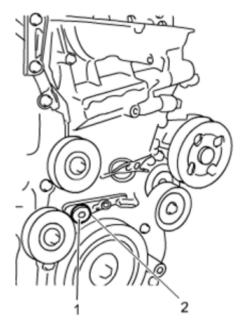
Identifying Timing Chain Cover Plug And Gasket Courtesy of SUZUKI OF AMERICA CORP.
